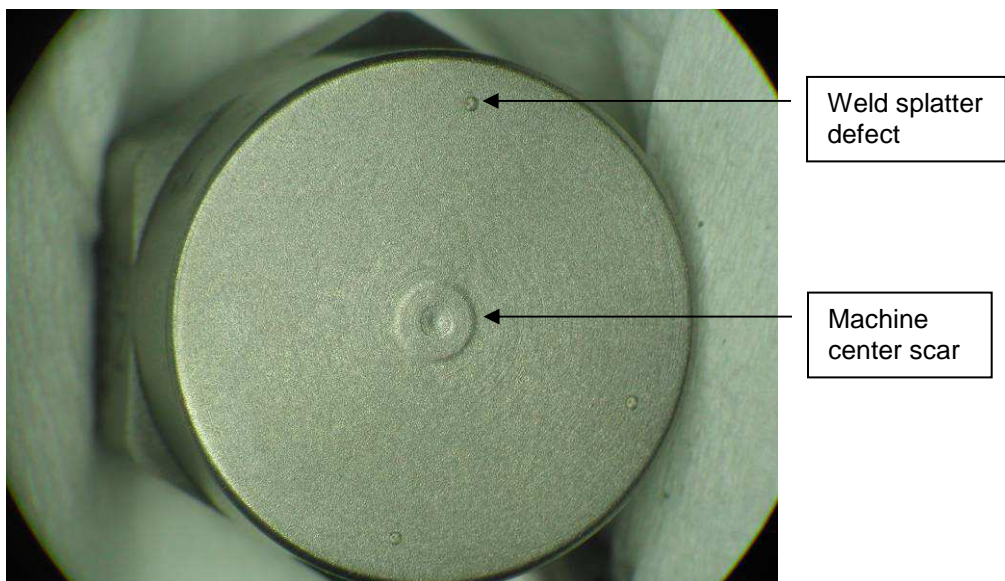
Unacceptable Machining Scar and Weld Spatter Example
